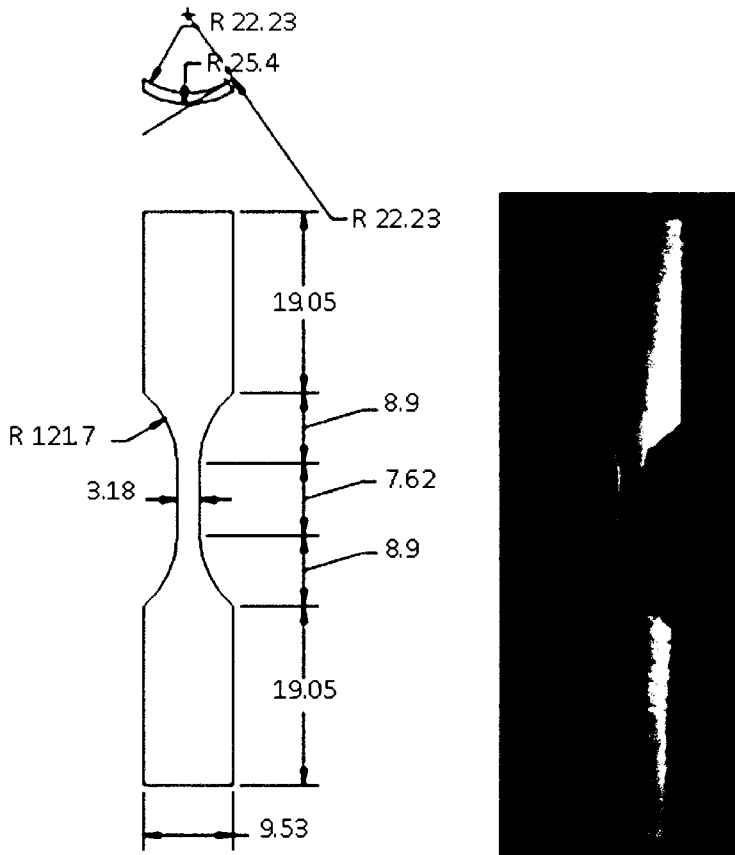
Tensile specimen cut along extrusion direction of OPP tube specimen dimensions are in mm.
